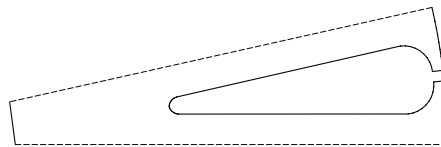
Slot shape for the rotors used in the 11 kW machine.
